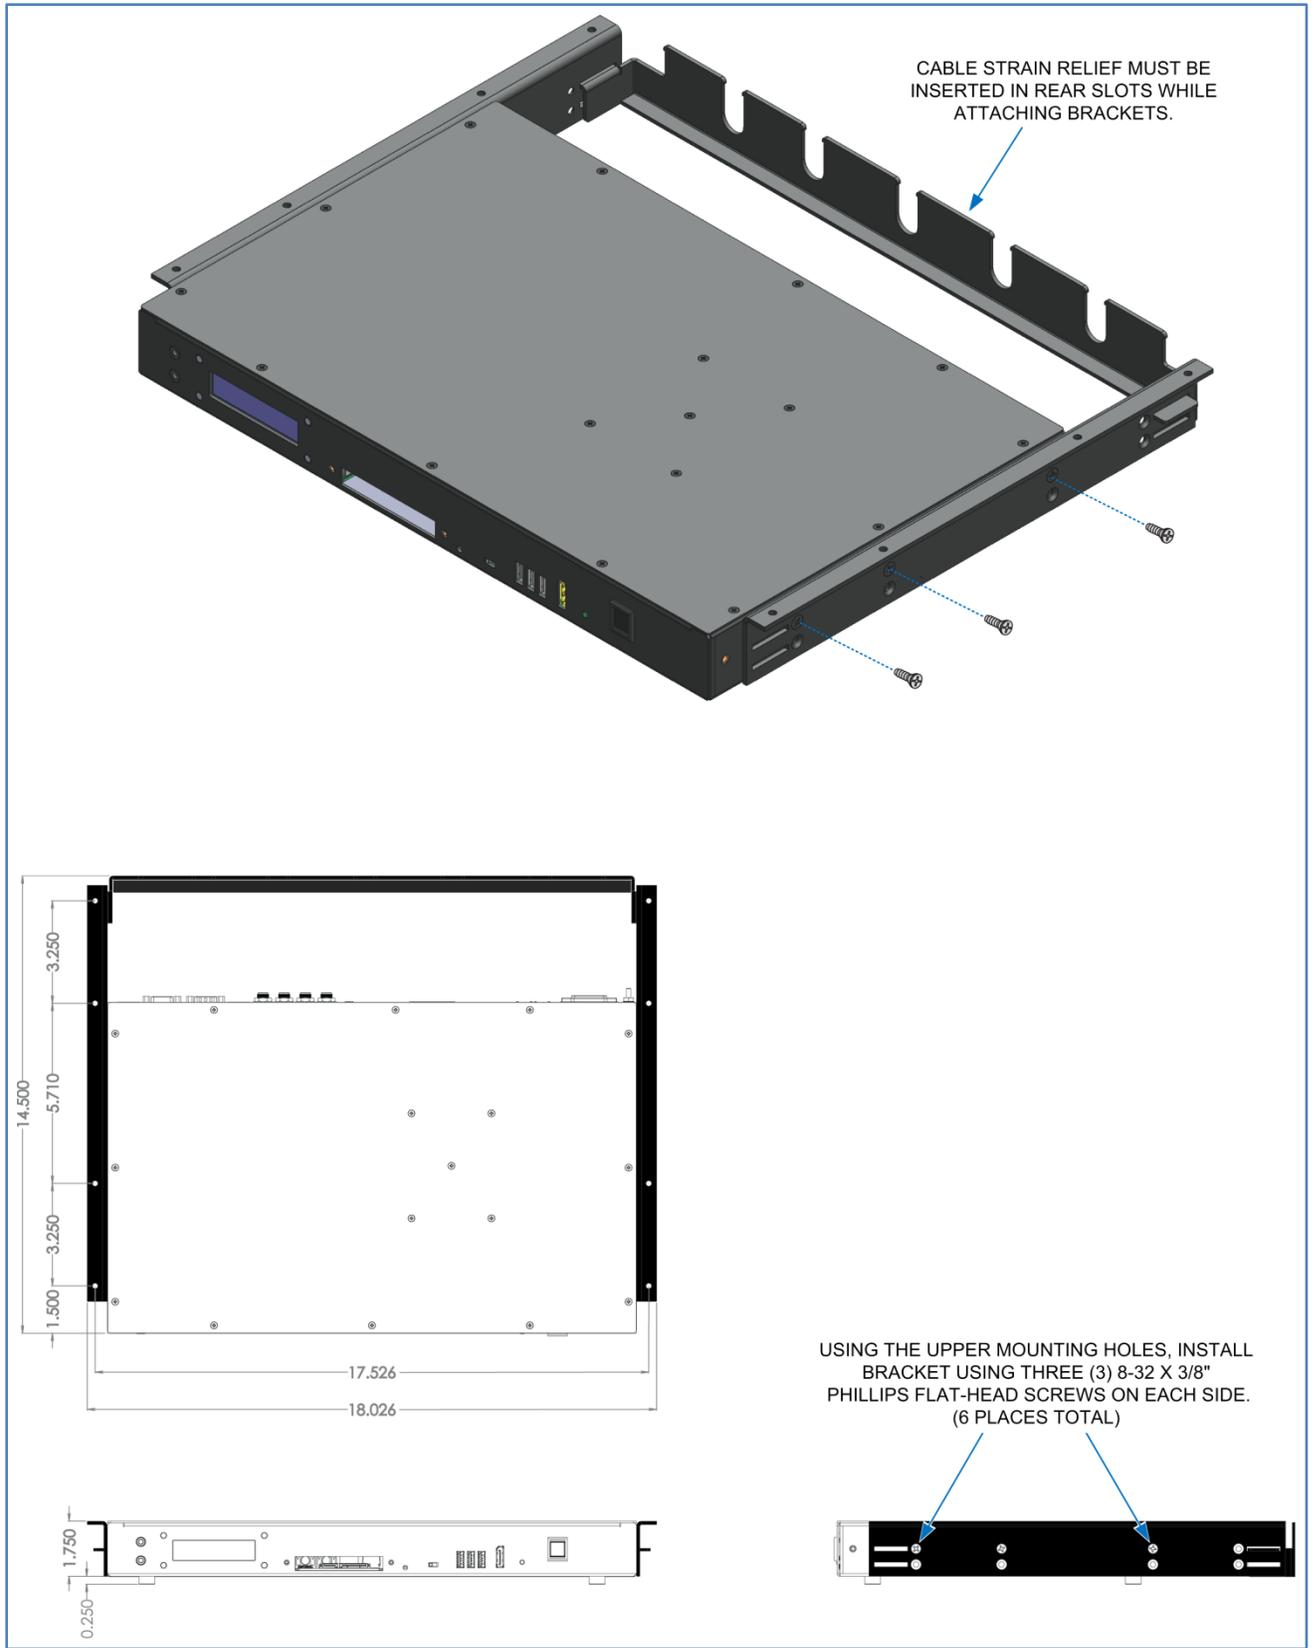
Attaching Brackets for Under the Desk Flush Mounting
